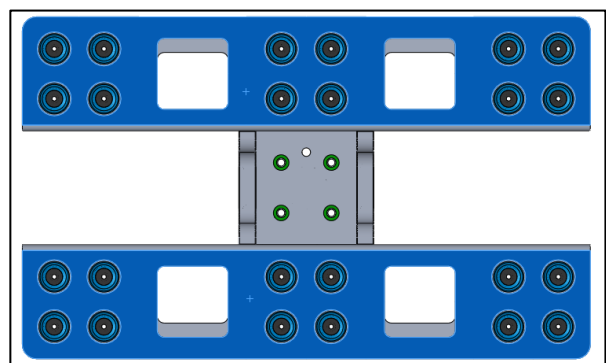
Highlighted contact surface between Packs and Vacuum Gripper.
